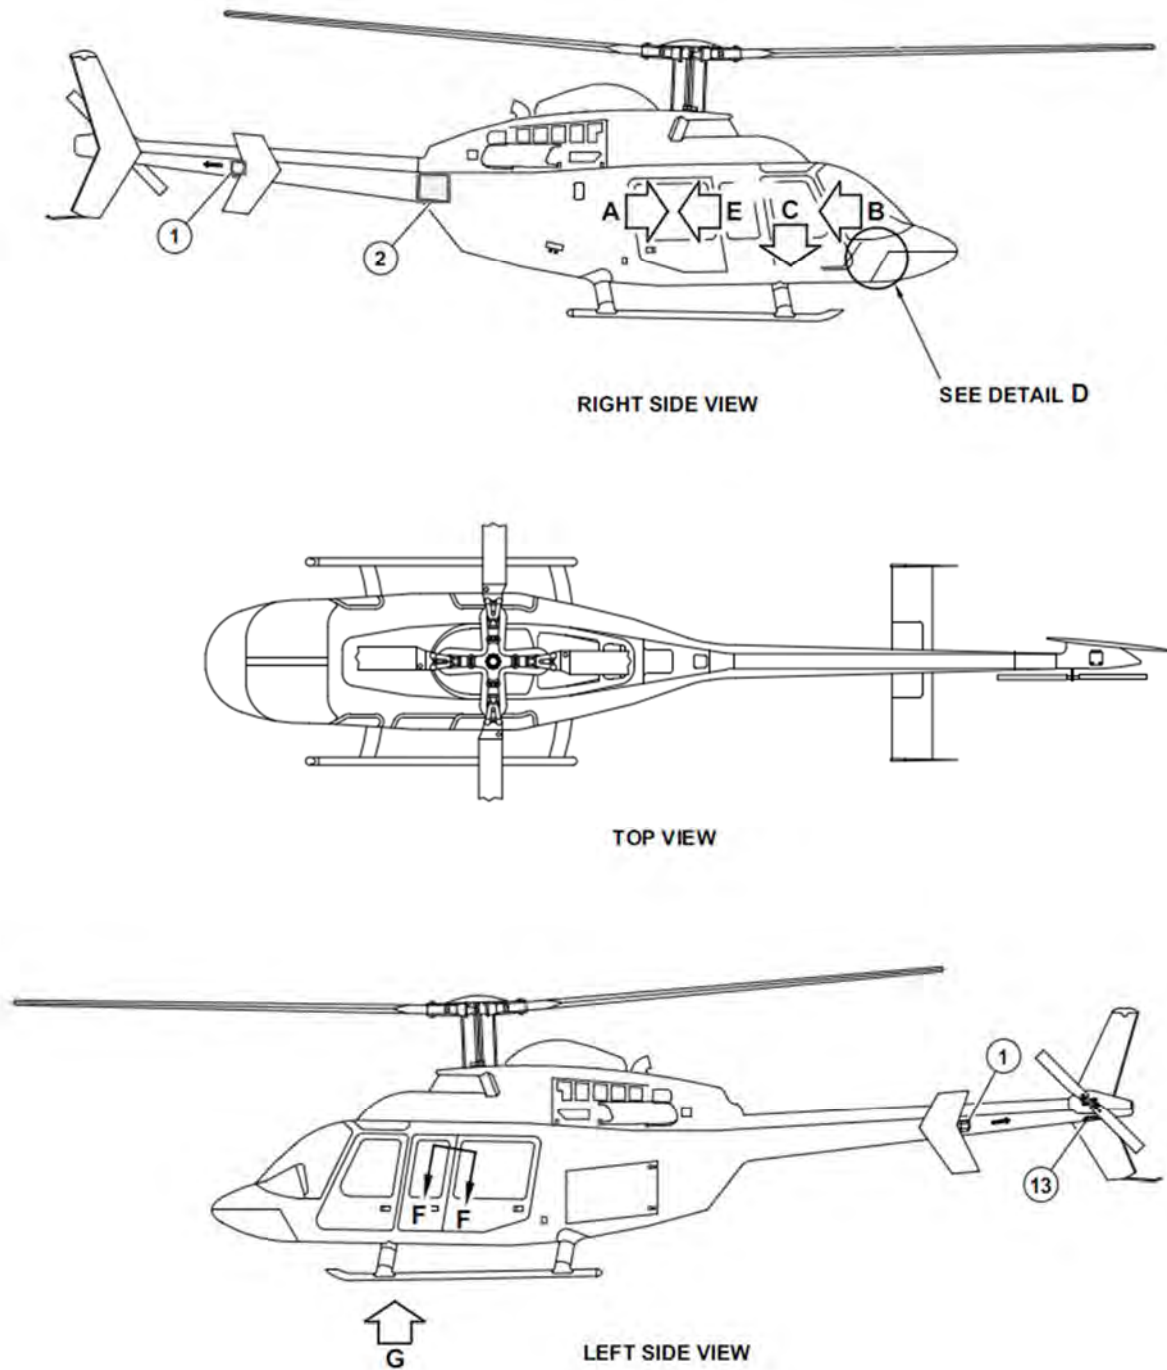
Structural Access Panels (Sheet 1 of 3)
